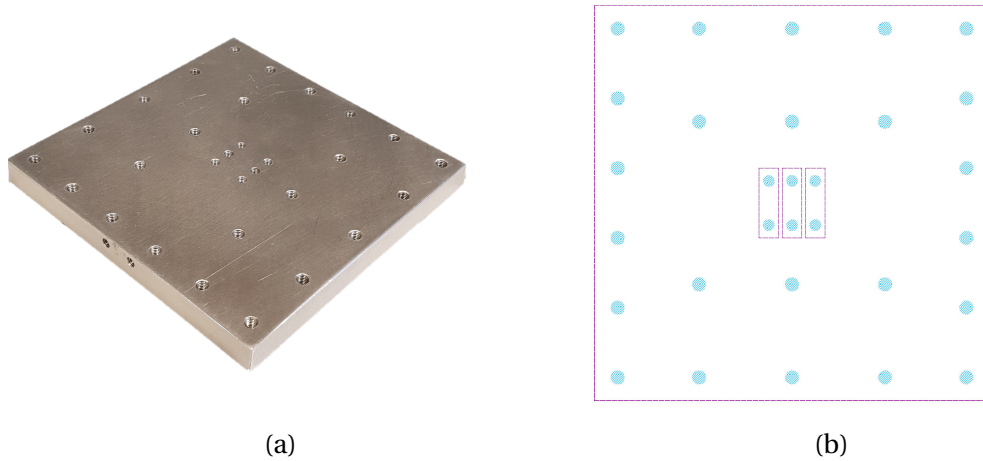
(a) Isometric view and (b) layout of the aluminium plate heatsink.
